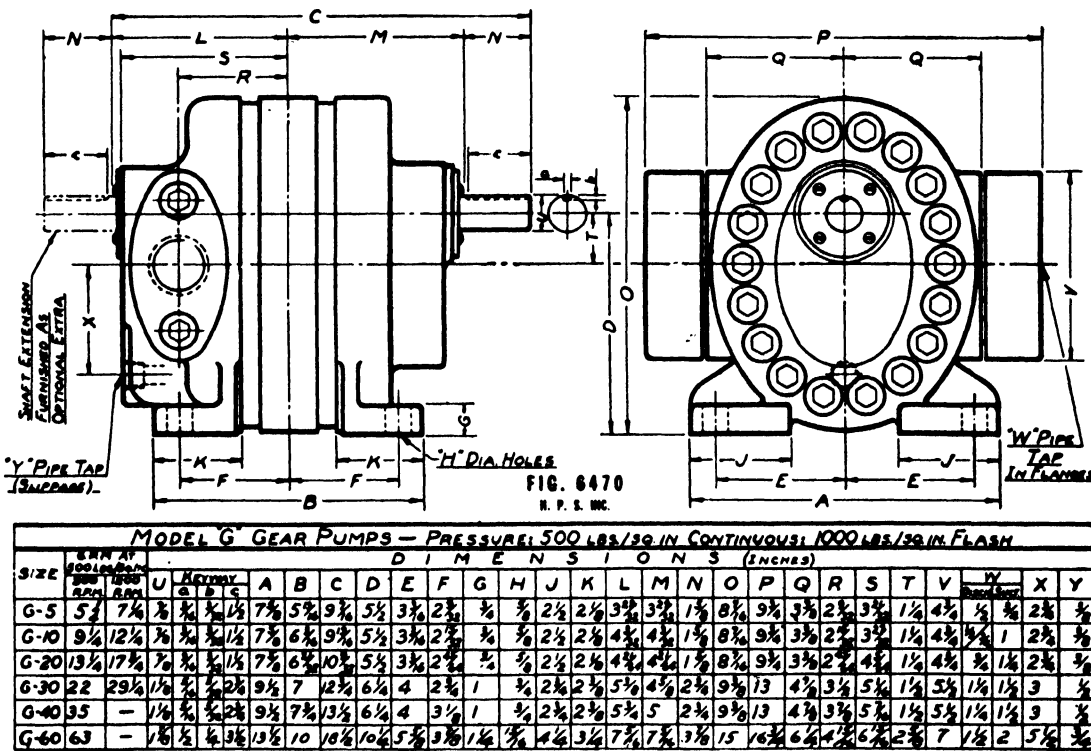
Mounting dimensions of Model G Hydro-Power Inc. pumps.
